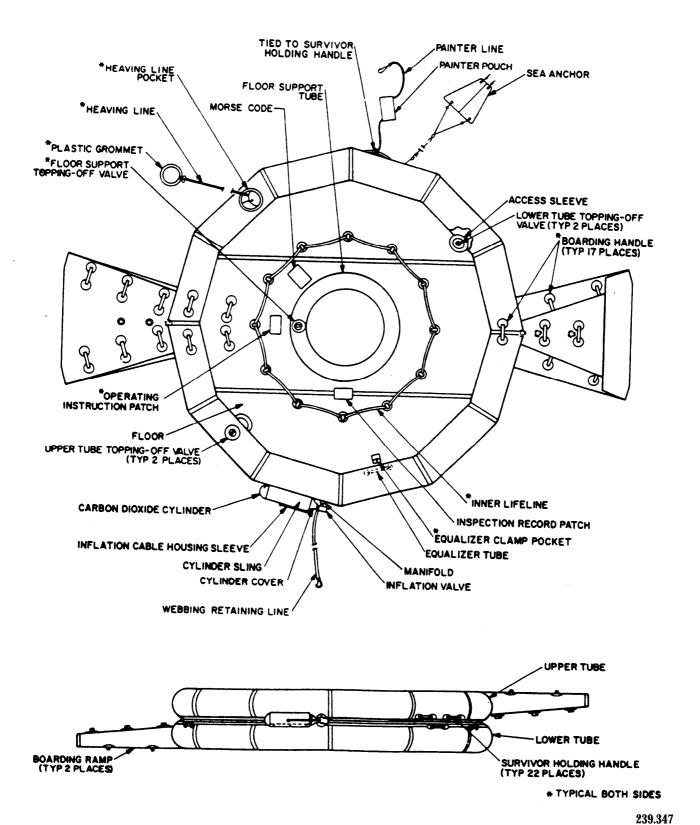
LRU-15/A life raft assembly, parts nomenclature.
